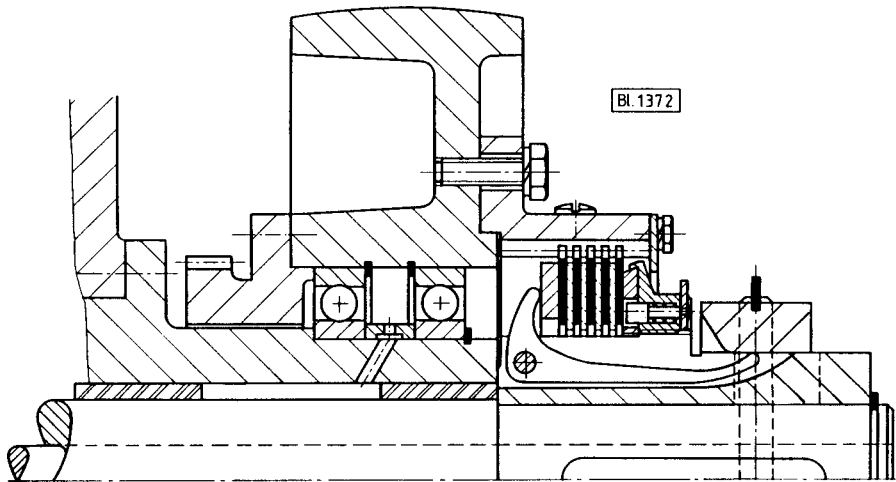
Sinus® multi-plate clutch, series 0100-030-, with flange housing and internal actuation. The clutch is actuated by a sliding rod in the hollow shaft. The sliding sleeve and control rod are linked with a cross pin.
